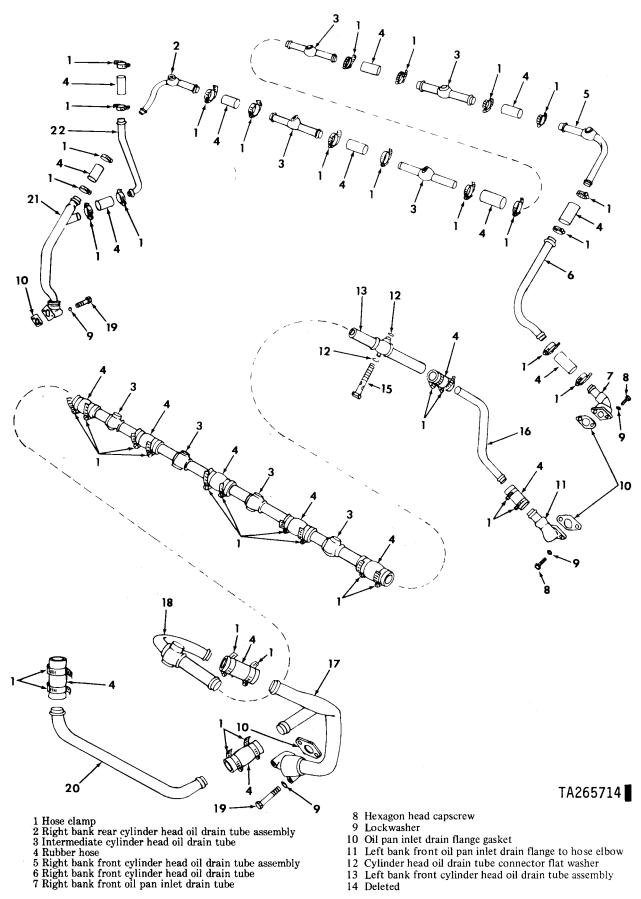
Cylinder head oil drain tubes and associated parts - exploded view.
